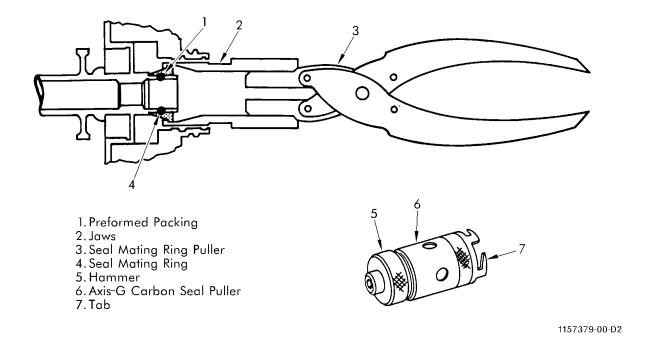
Axis-G Carbon Seal Puller 21C7239G01/G02 and Seal Mating Ring Puller 21C7702G01
